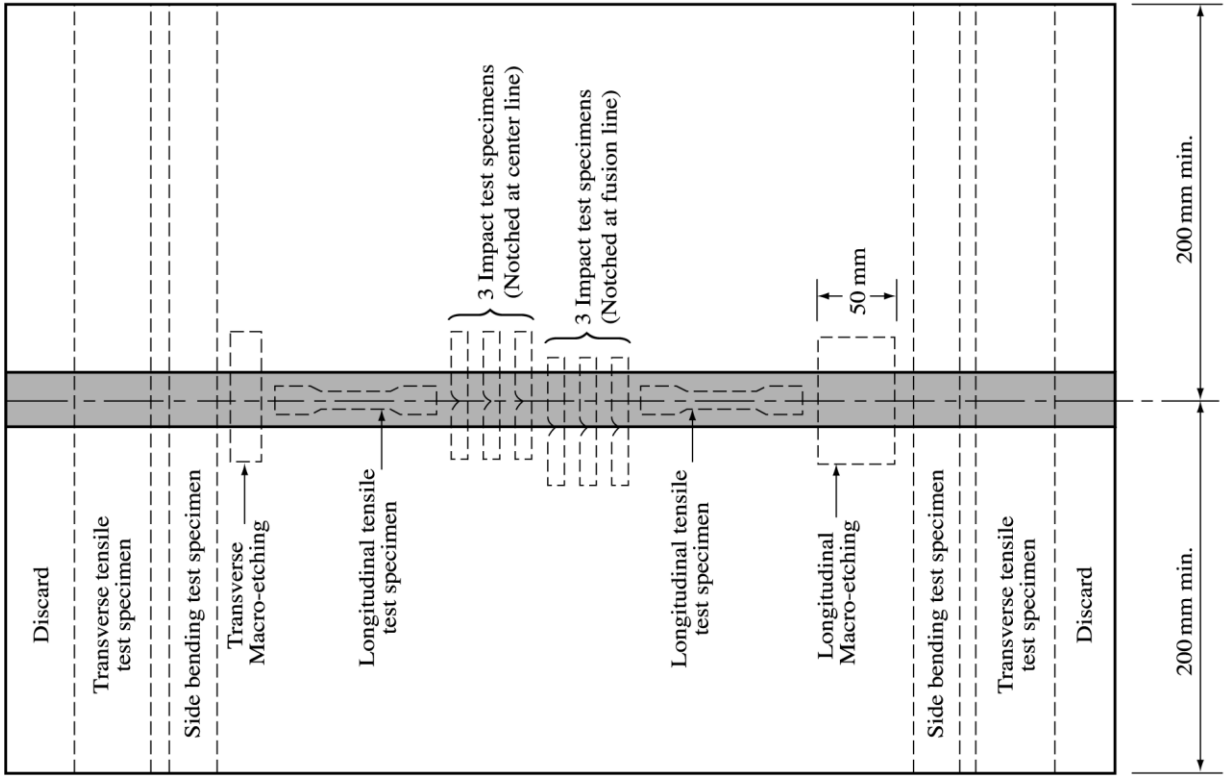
Butt Weld Test Assembly for Electro-slag or Electro-gas Welding Materials
